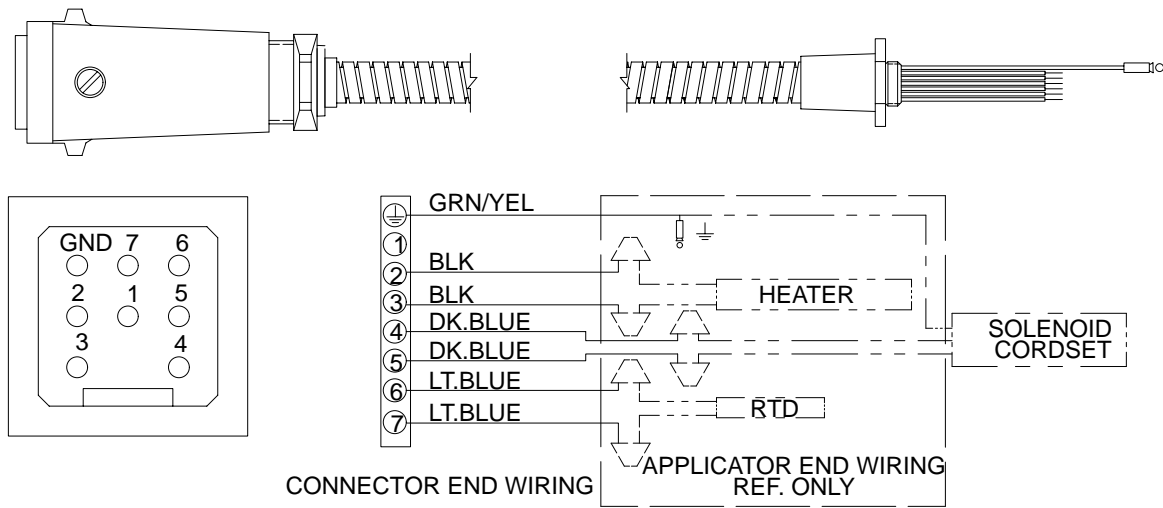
M-style adhesive manifold cordset wiring diagram
